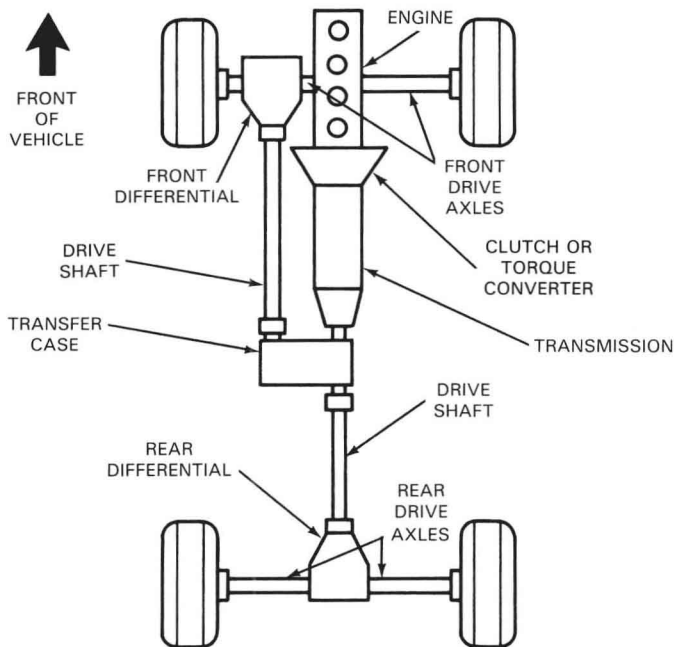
In the four-wheel drive system, power may be delivered to both front and rear wheels. The system contains a front drive shaft and final drive, which resemble the rear drive components. The heart of the four-wheel drive system is the transfer case. The driver selects two-wheel or four-wheel drive. In four-wheel drive, the transfer case divides power between front and rear drive shafts. In two-wheel drive, it sends power only to the rear.
